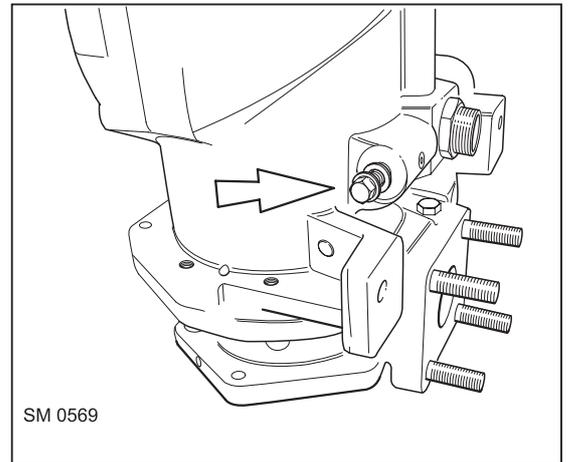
Fitting New G 1/4" Plug and Seal
